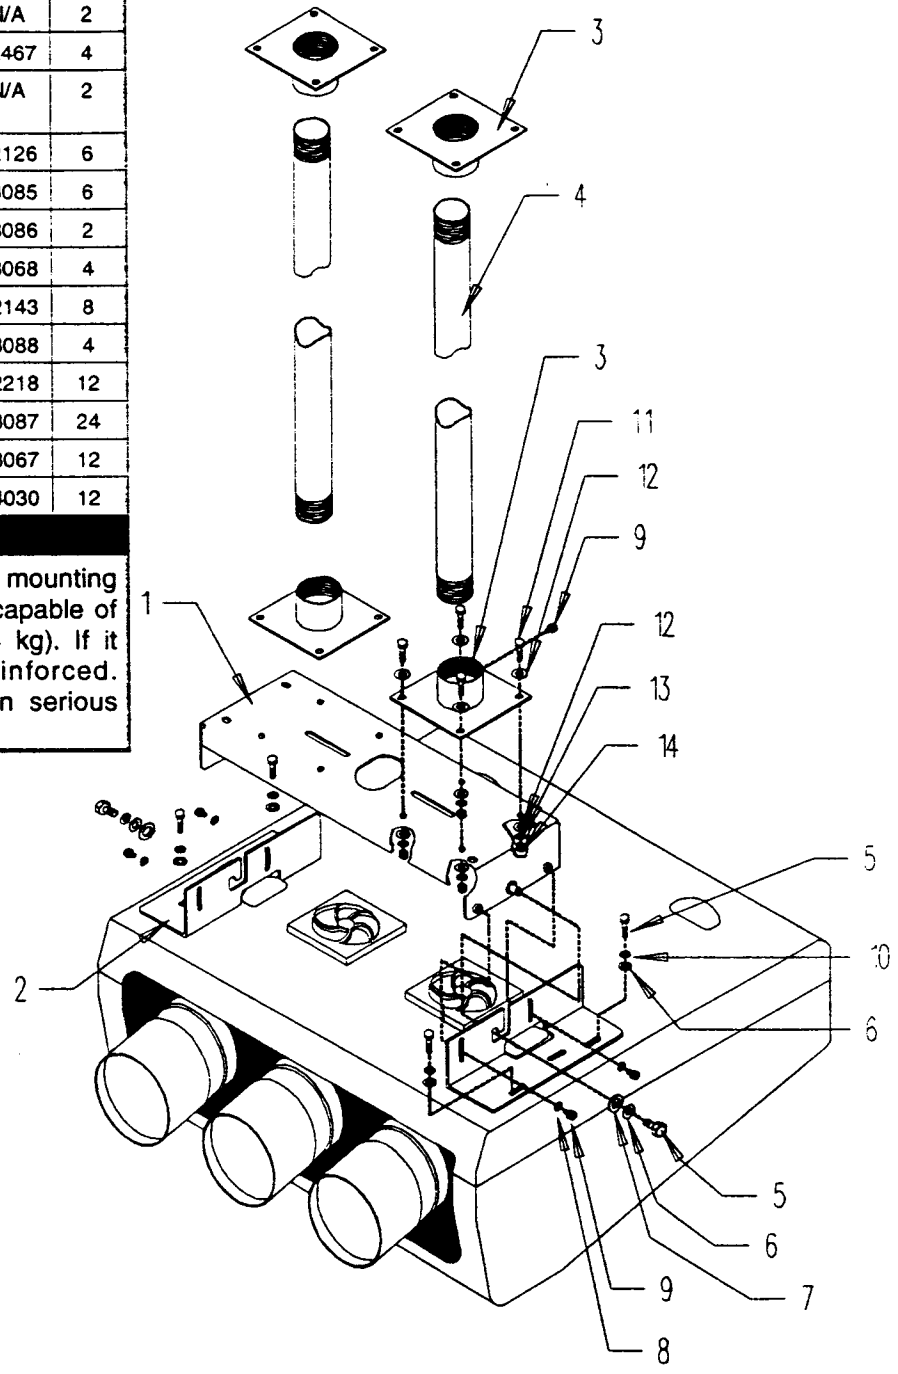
AMPRO 4600 CEILING MOUNT EXPLODED VIEW.
